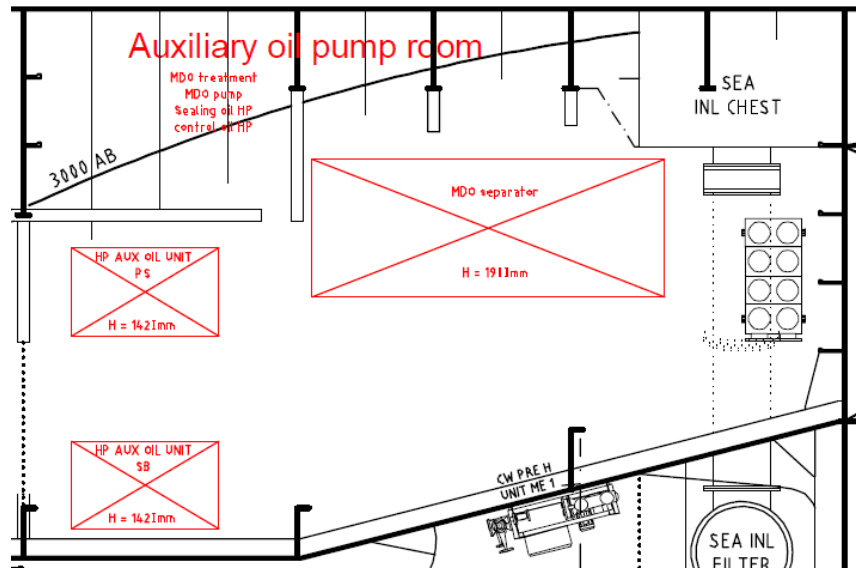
Auxiliary oil pump room Port side, floor level
